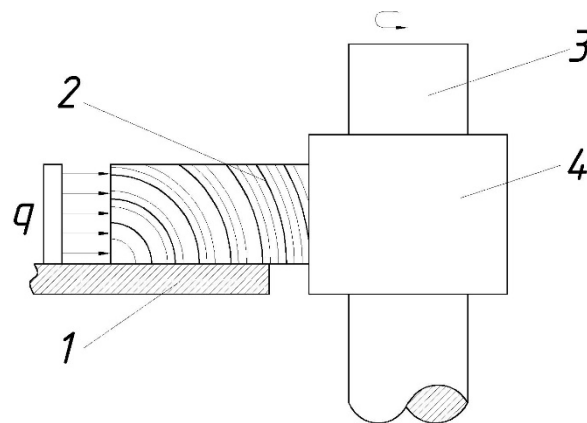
Principle scheme of a rotating steel lapping device: 1 – table of the spindle moulder; 2 – object for lapping (samples); 3 – spindle of the spindle moulder; 4 – working tool (cylindrical steel circlet).
